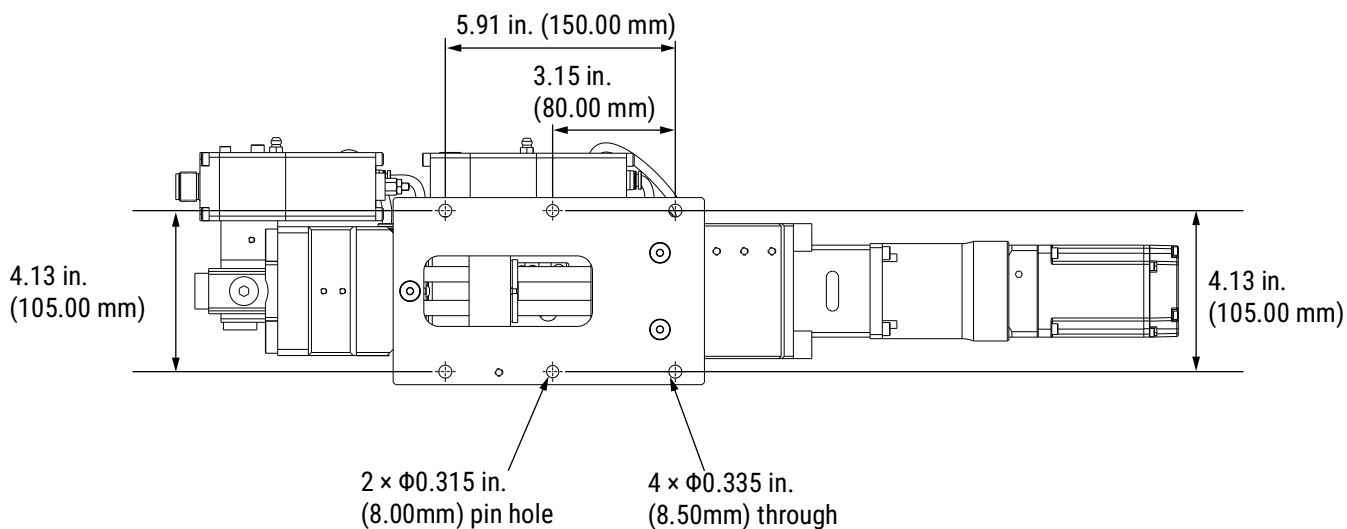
Mounting Hole Dimensions for Installing the PSM Ambient Metering Unit - 25cc and 50cc
